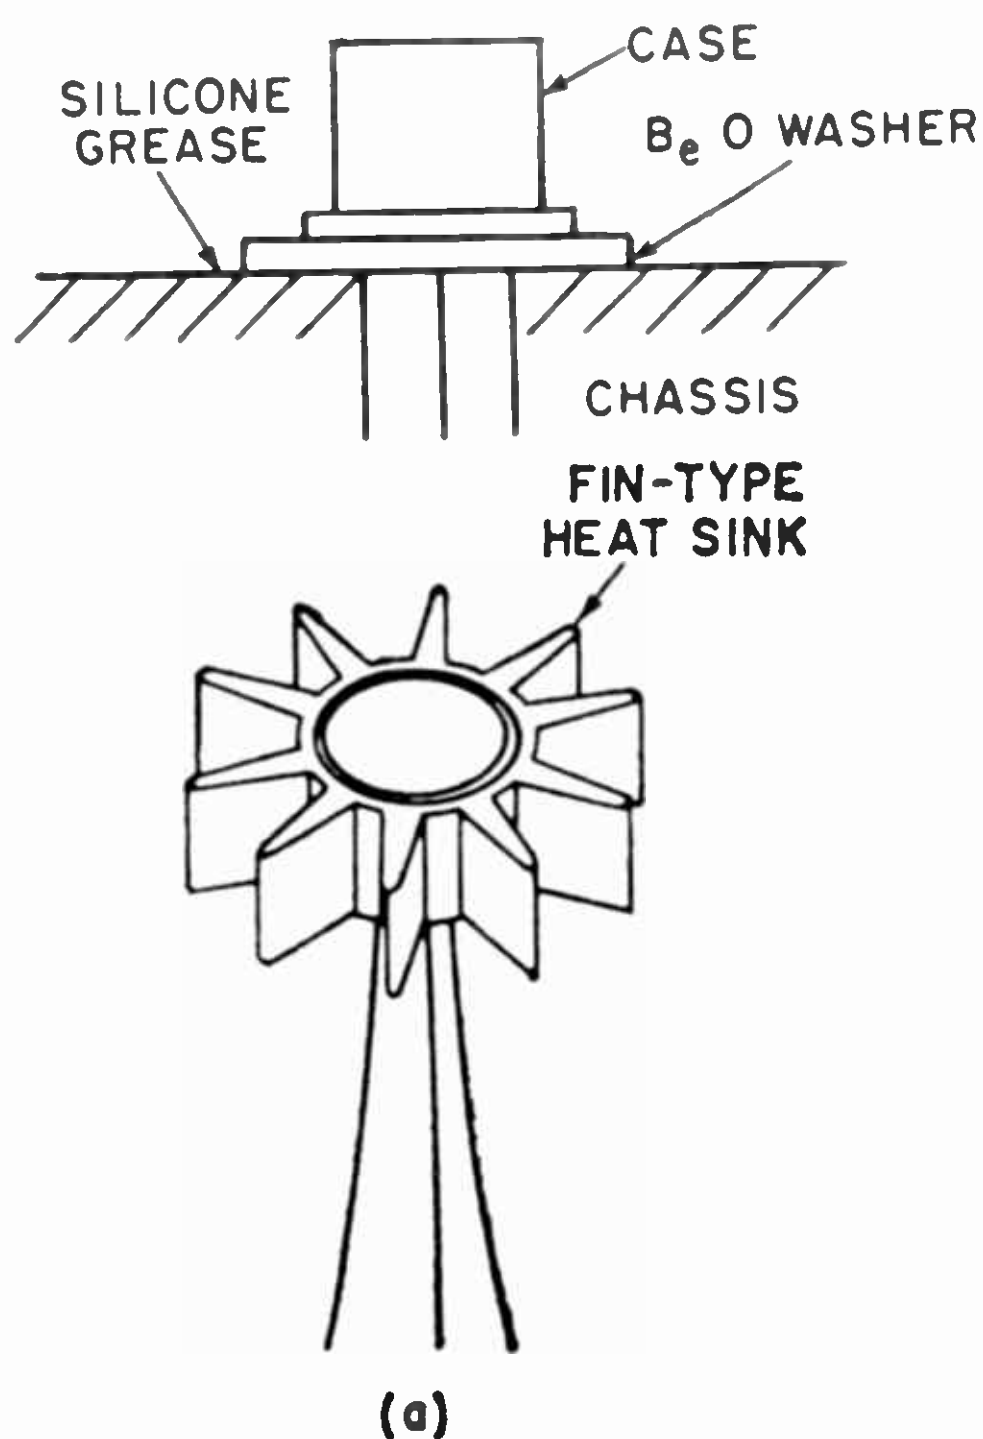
Suggested mounting arrangements for transistors in JEDEC TO-5 package.
